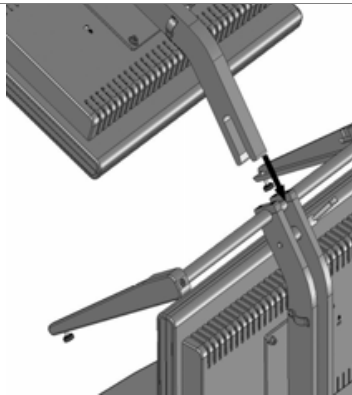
The Upper monitor mounting arm slides into the lower mount assembly.
